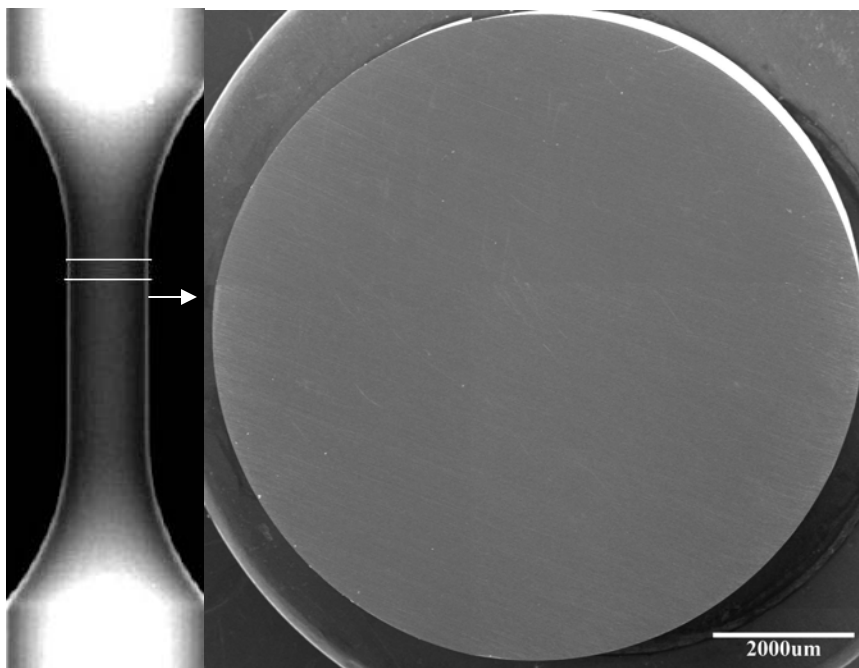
Radiograph with Indicated Fracture Zone and a Macroscopic View of a Cylinder with 3 mm Disc Specimen with the Fracture Surface Ground Back (Specimen E5)
